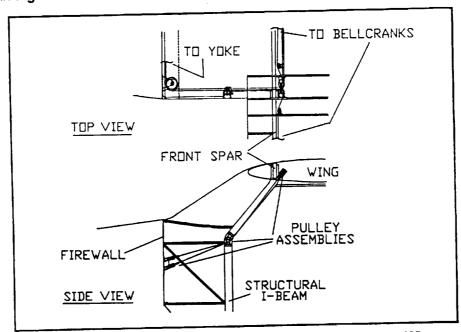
Top and Side View of Aileron Cable Routing to Wing
